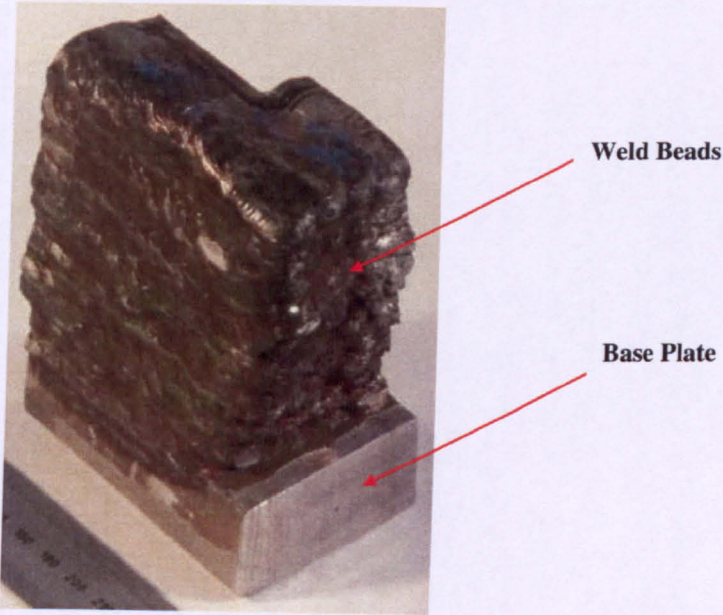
3D view of multi-pass weld-pad
